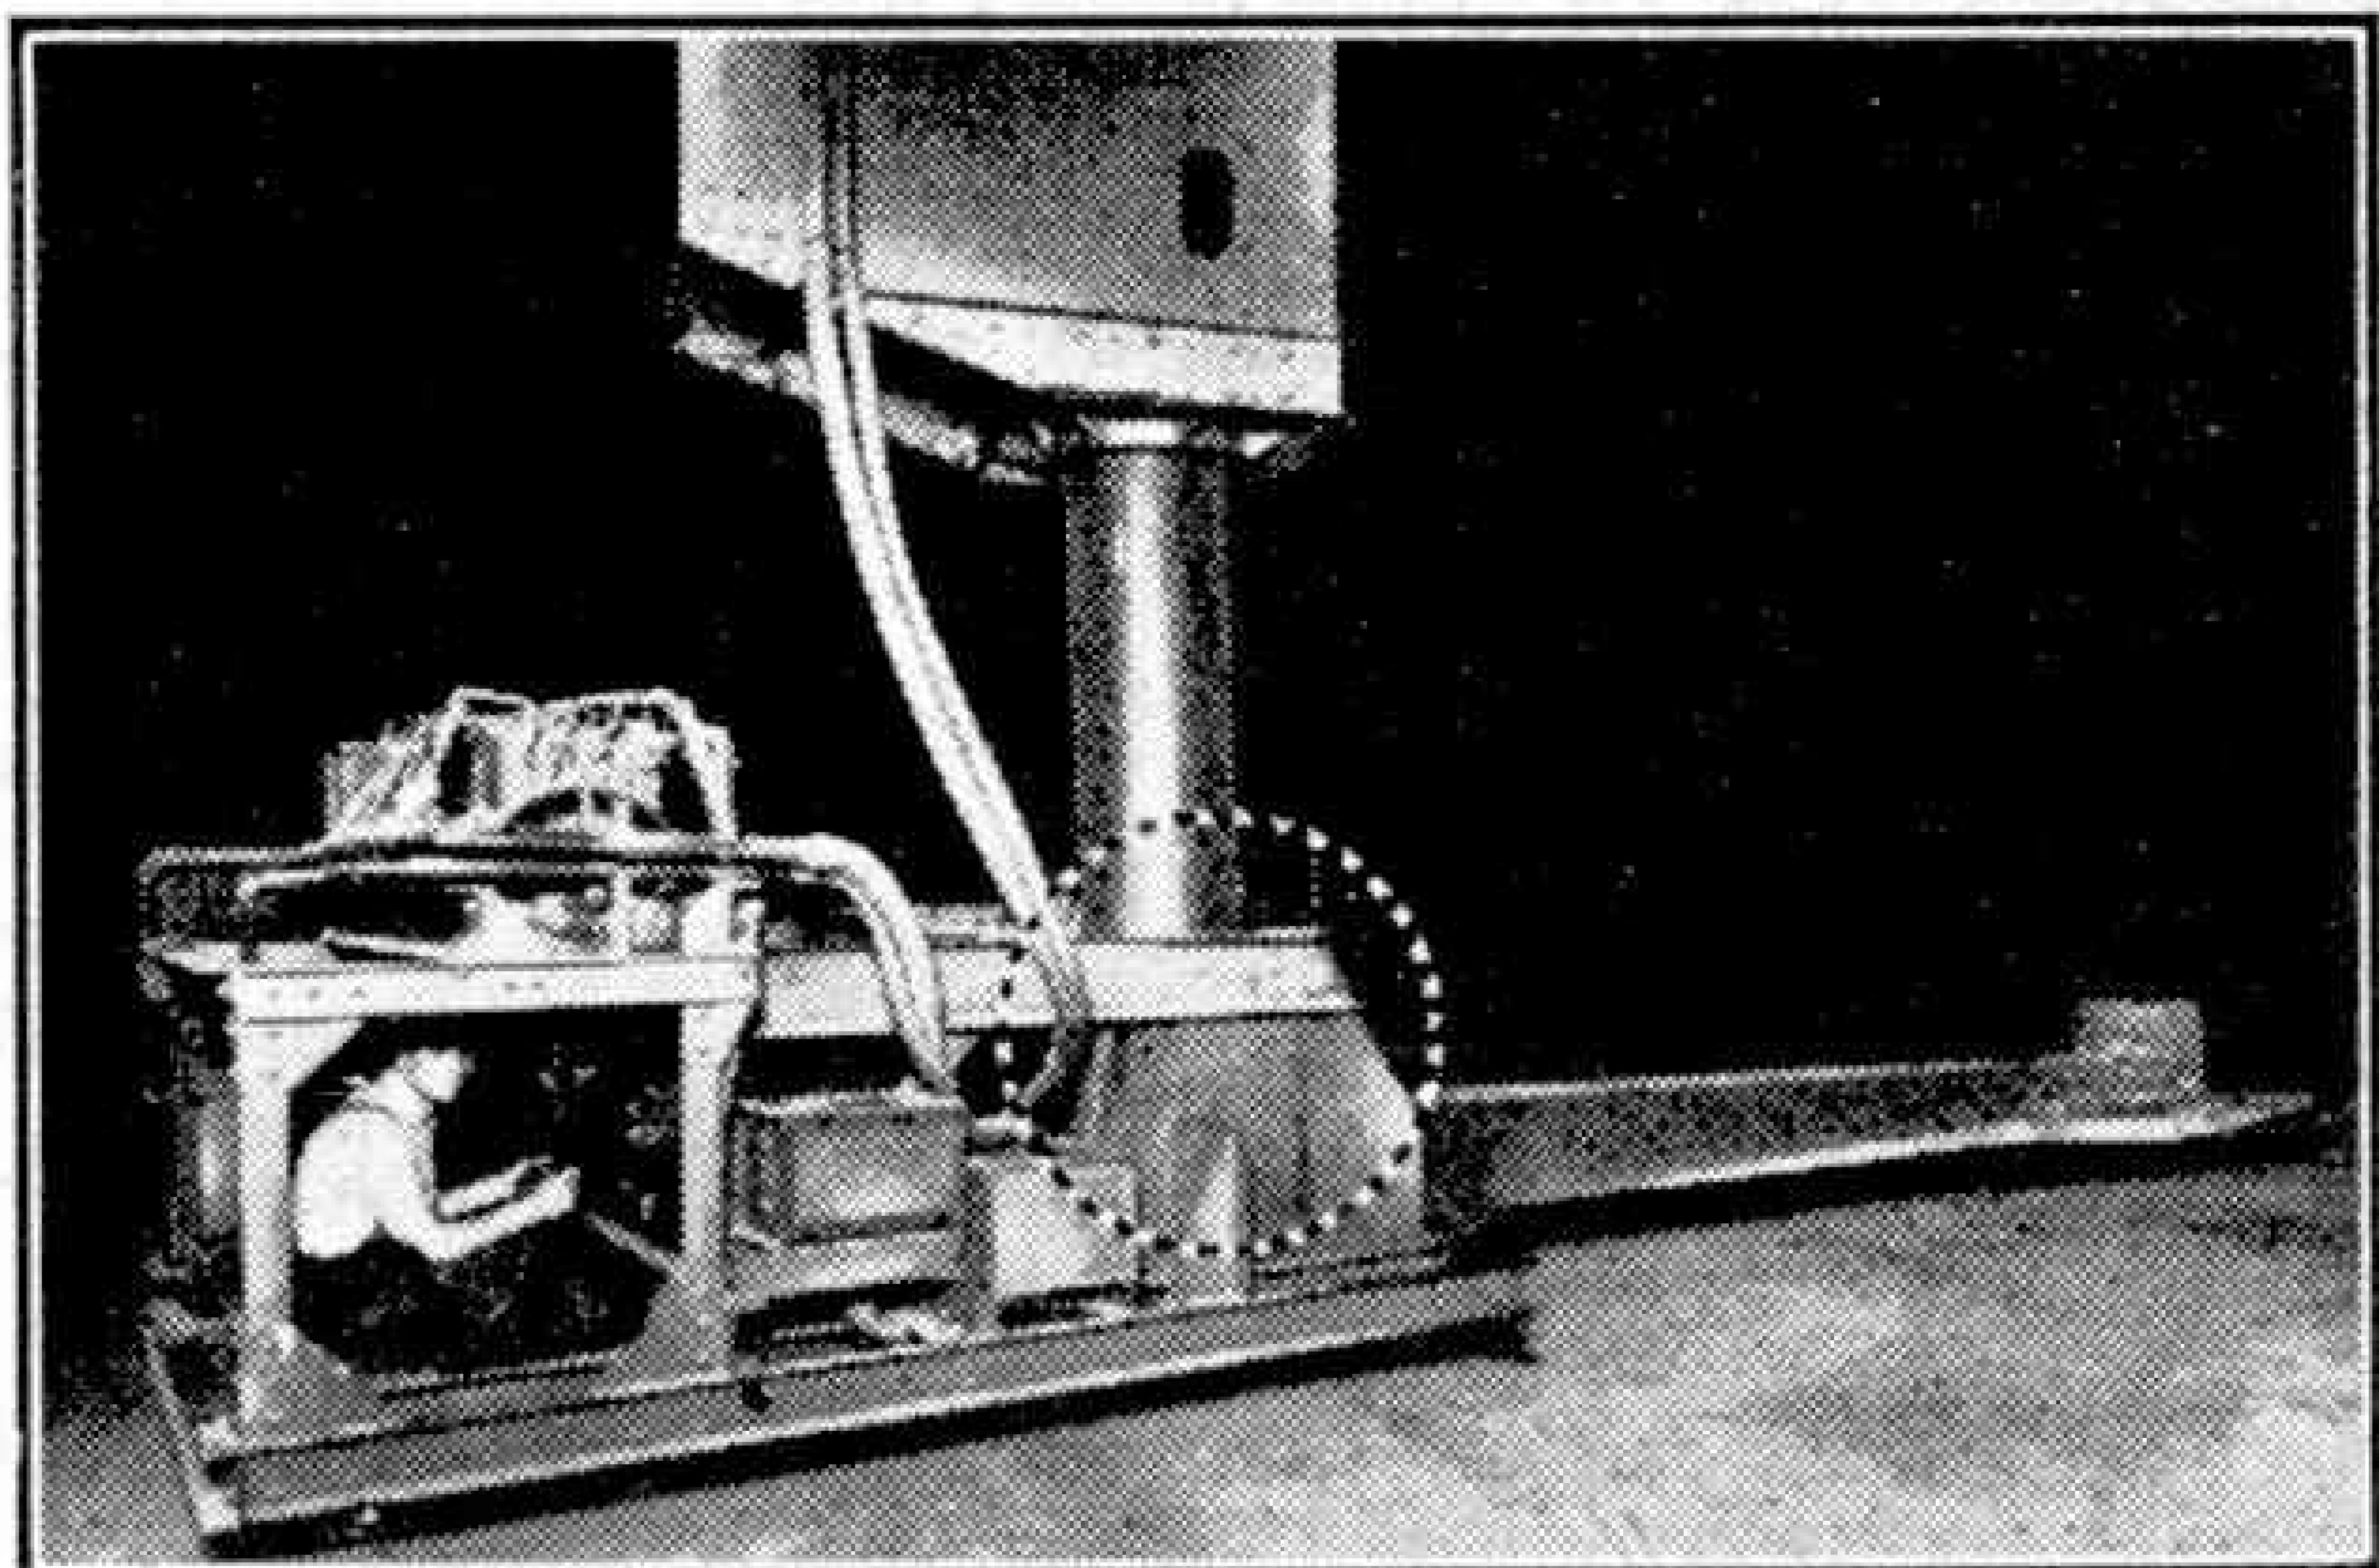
Cracks in the portion of this crucible loading machine shown inside the dotted ring were repaired on "Barimar" mobile welding plant. The illustrations to this article are by courtesy of Barimar Ltd.
